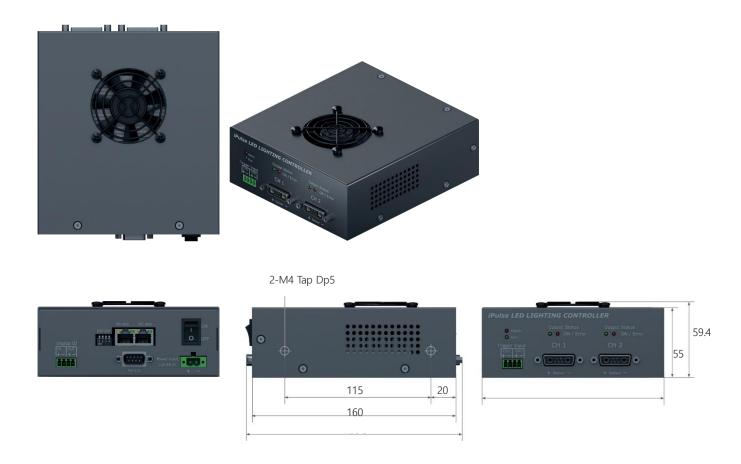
Mechanical Dimensions (in mm) for 2channel High power strobe controller
